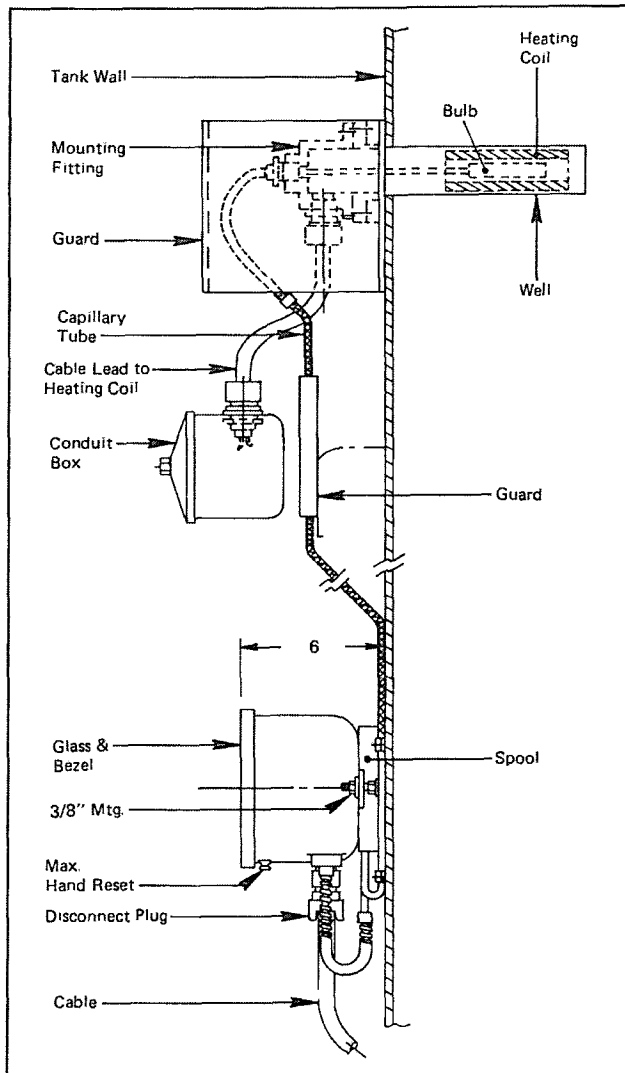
Typical Mounting Arrangement on Transformer Tank Wall
